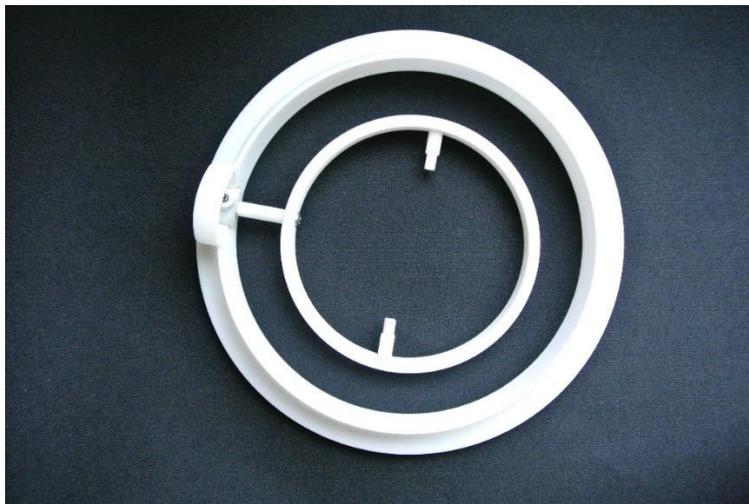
Photo of the shafts in the 3D-printed prototype.
